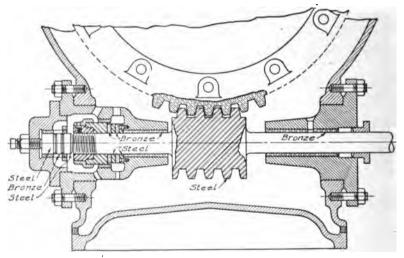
Section through Worm-Gear Housing, Showing End-Thrust Arrangement
